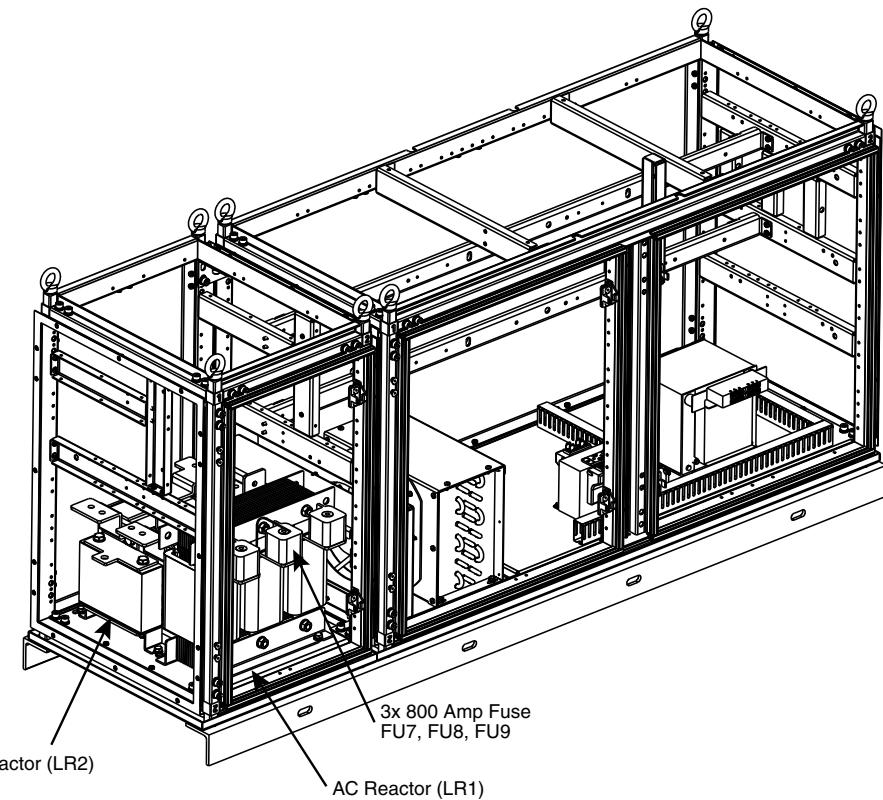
680 Amp VFD Assembly Detail Showing Reactor and Main Line Fuse Locations
